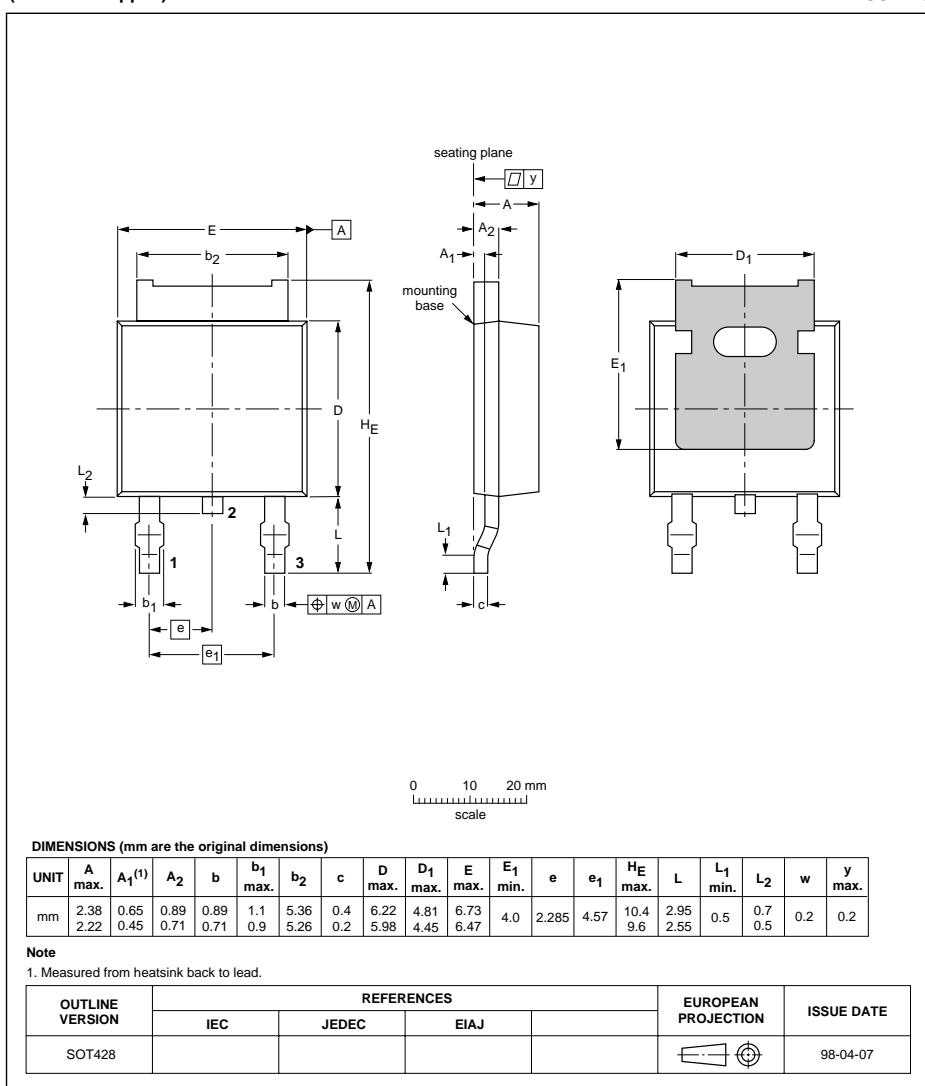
SOT428 surface mounting package. Centre pin connected to mounting base.
